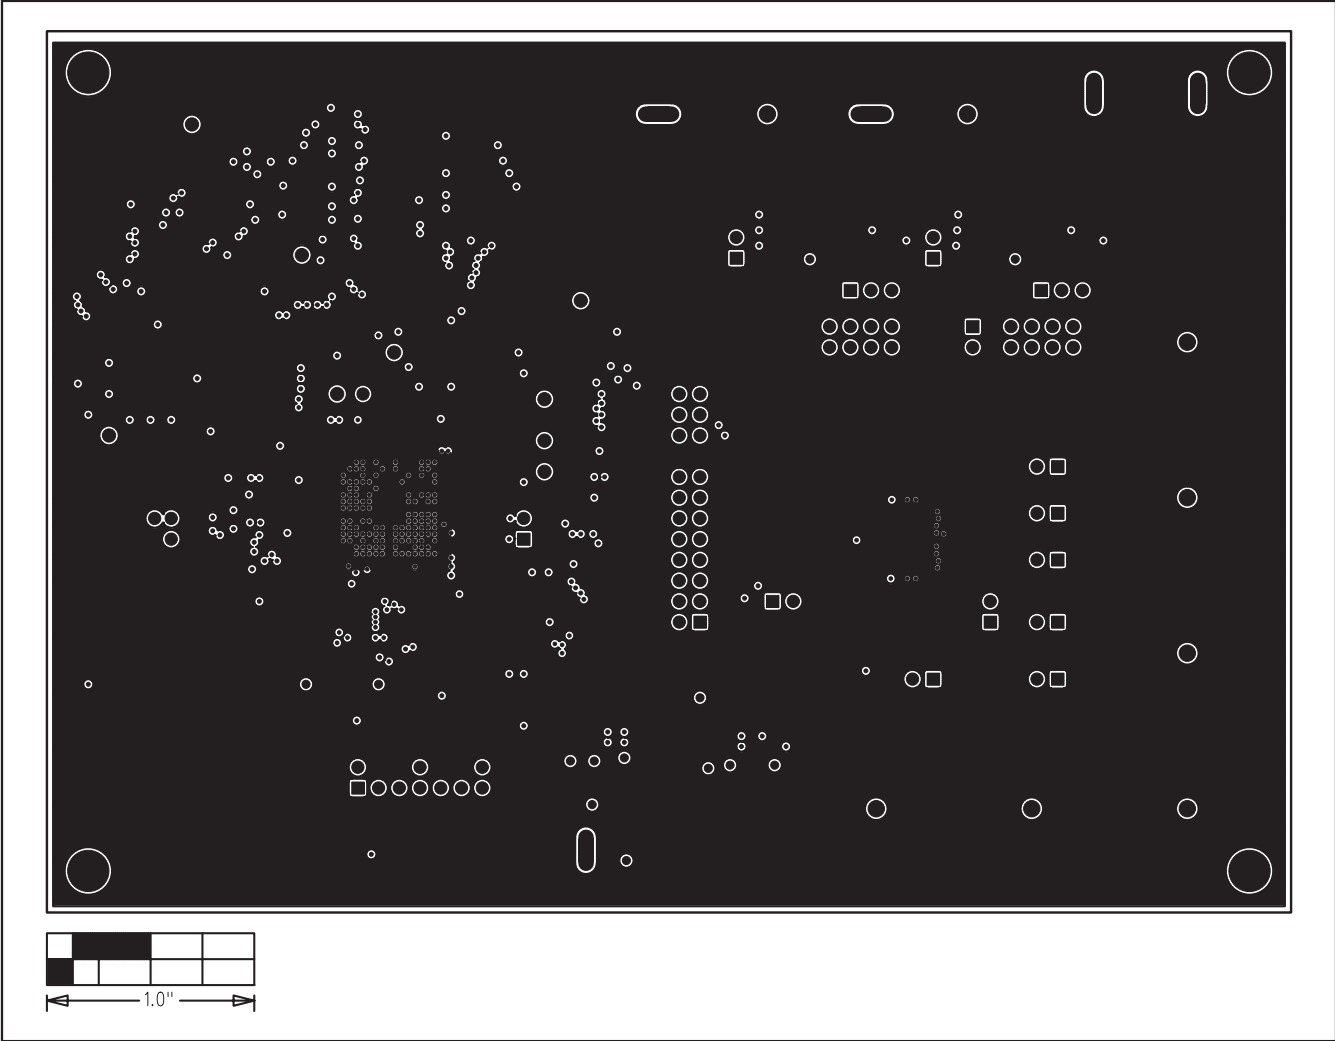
MAX11046 EV Kit PCB Layout—Inner Layer 5
